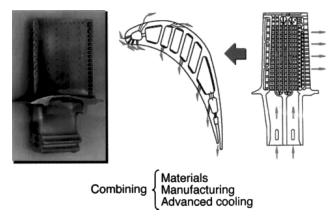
$\,$ F100-PW-220 SC turbine blade with film and convection serpentine cooling (courtesy of Pratt & Whitney).
